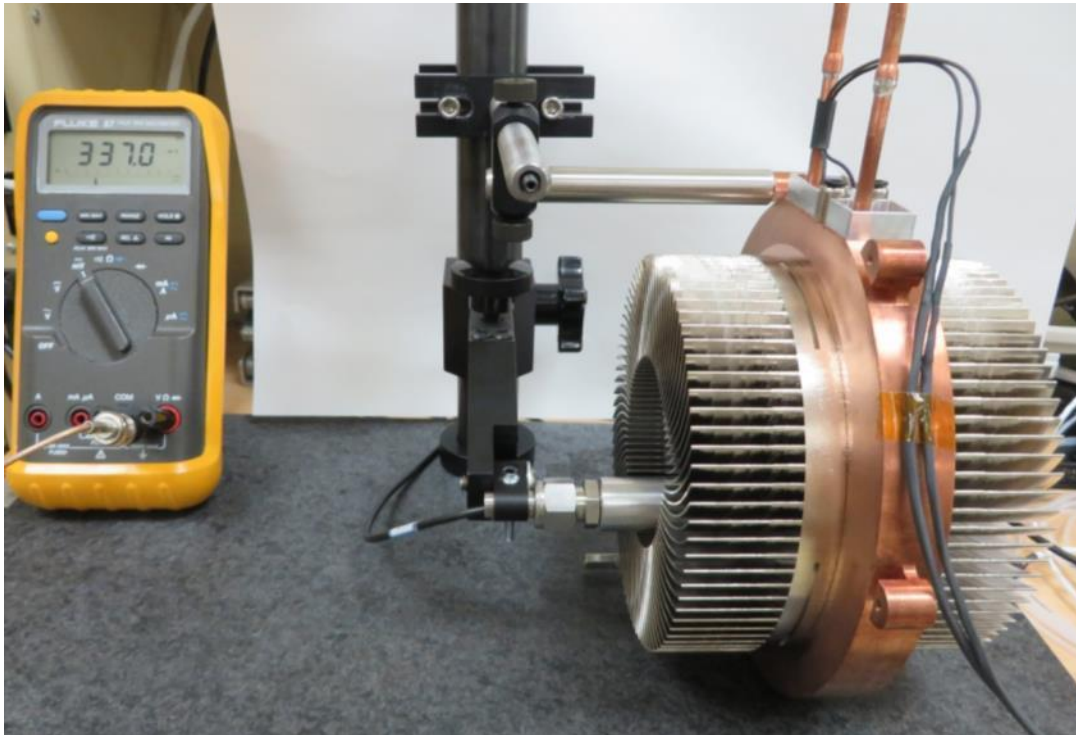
Eddy current sensor used to set the impeller air gaps
